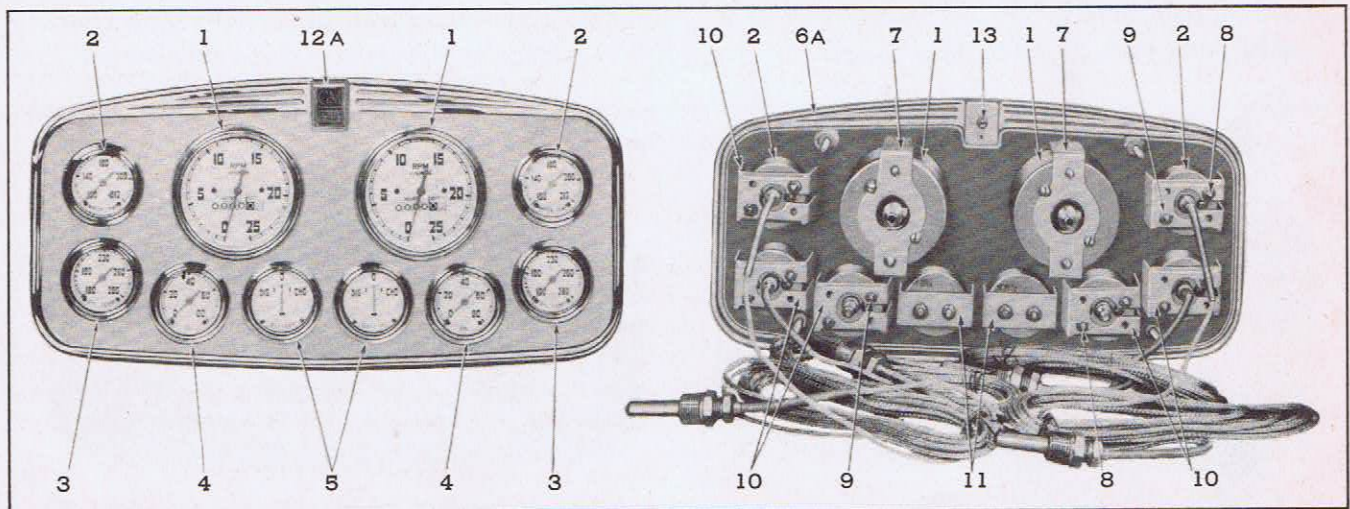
MECHANICAL INSTRUMENT PANEL ASSEMBLY FOR TWIN ENGINE UNIT.
